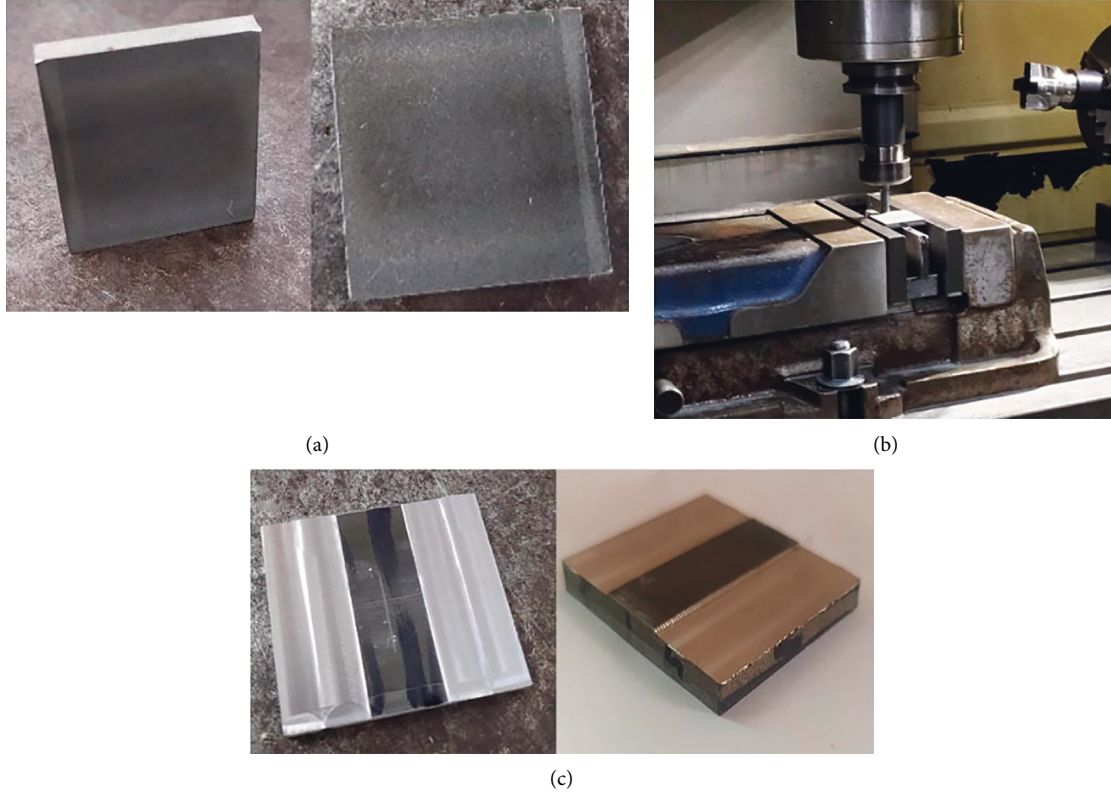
(a) DMLS Inconel 718 sample, (b) milling process, and (c) machined sample.
